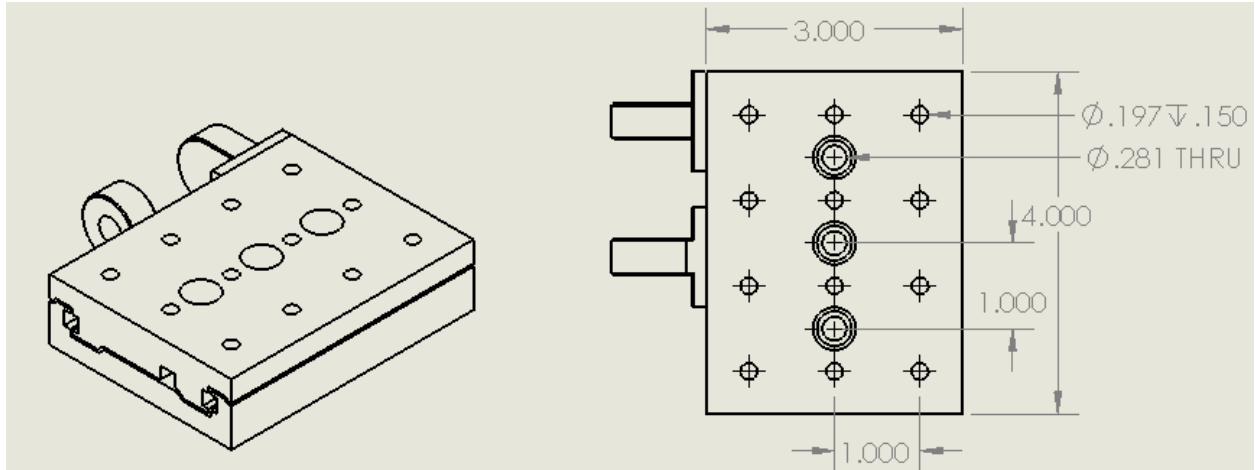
Linear stage which will sit beneath the rotational stage of the flow cell; all dimensions are in inches. (Schematic and drawing courtesy of [Newport Corp.](#))
